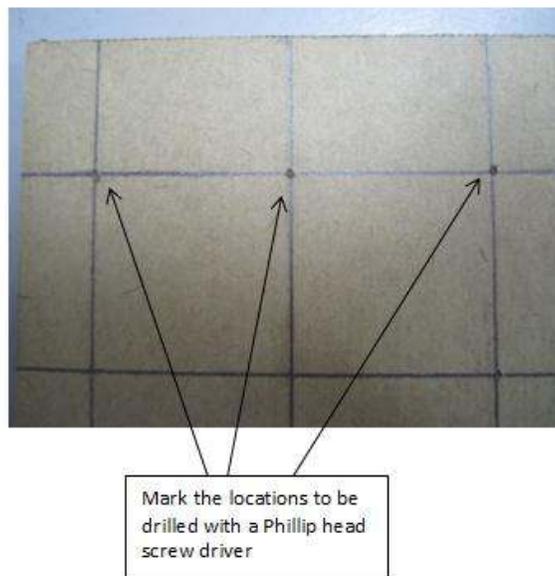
Mark the location to be drilled using a Phillip head screw driver
